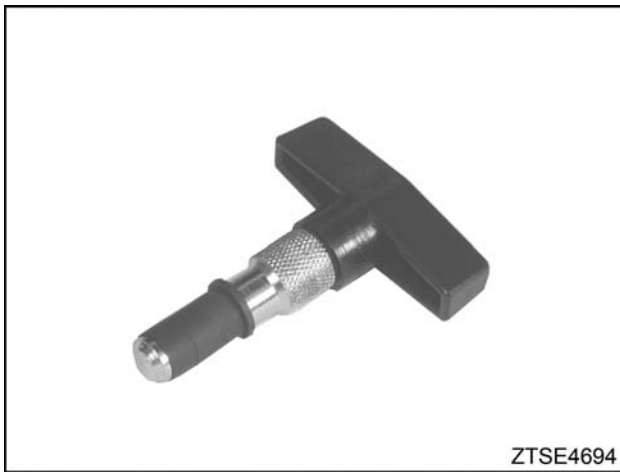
Case-to-Head Tube Removal Tool, ZTSE4694
